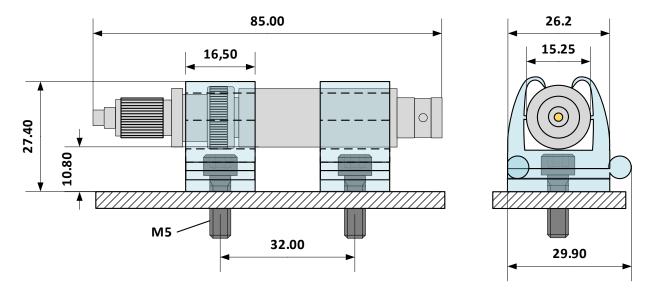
Dimensions of ICA10 & ICA1 with holders (in mm)
